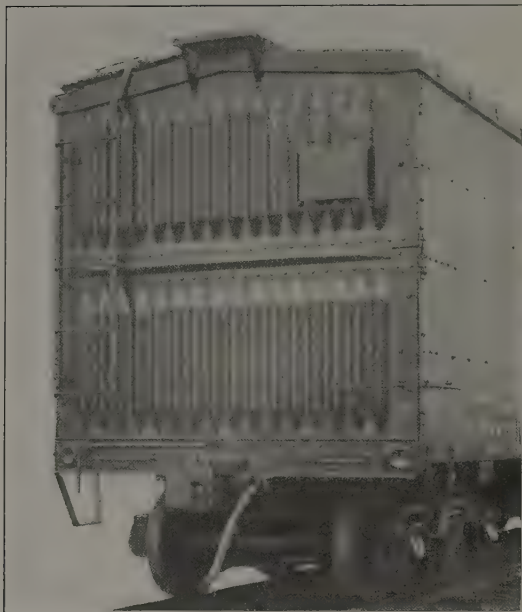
American Car & Foundry Company Two-Piece Steel End of  $\frac{1}{4}$ -in. Plate.
